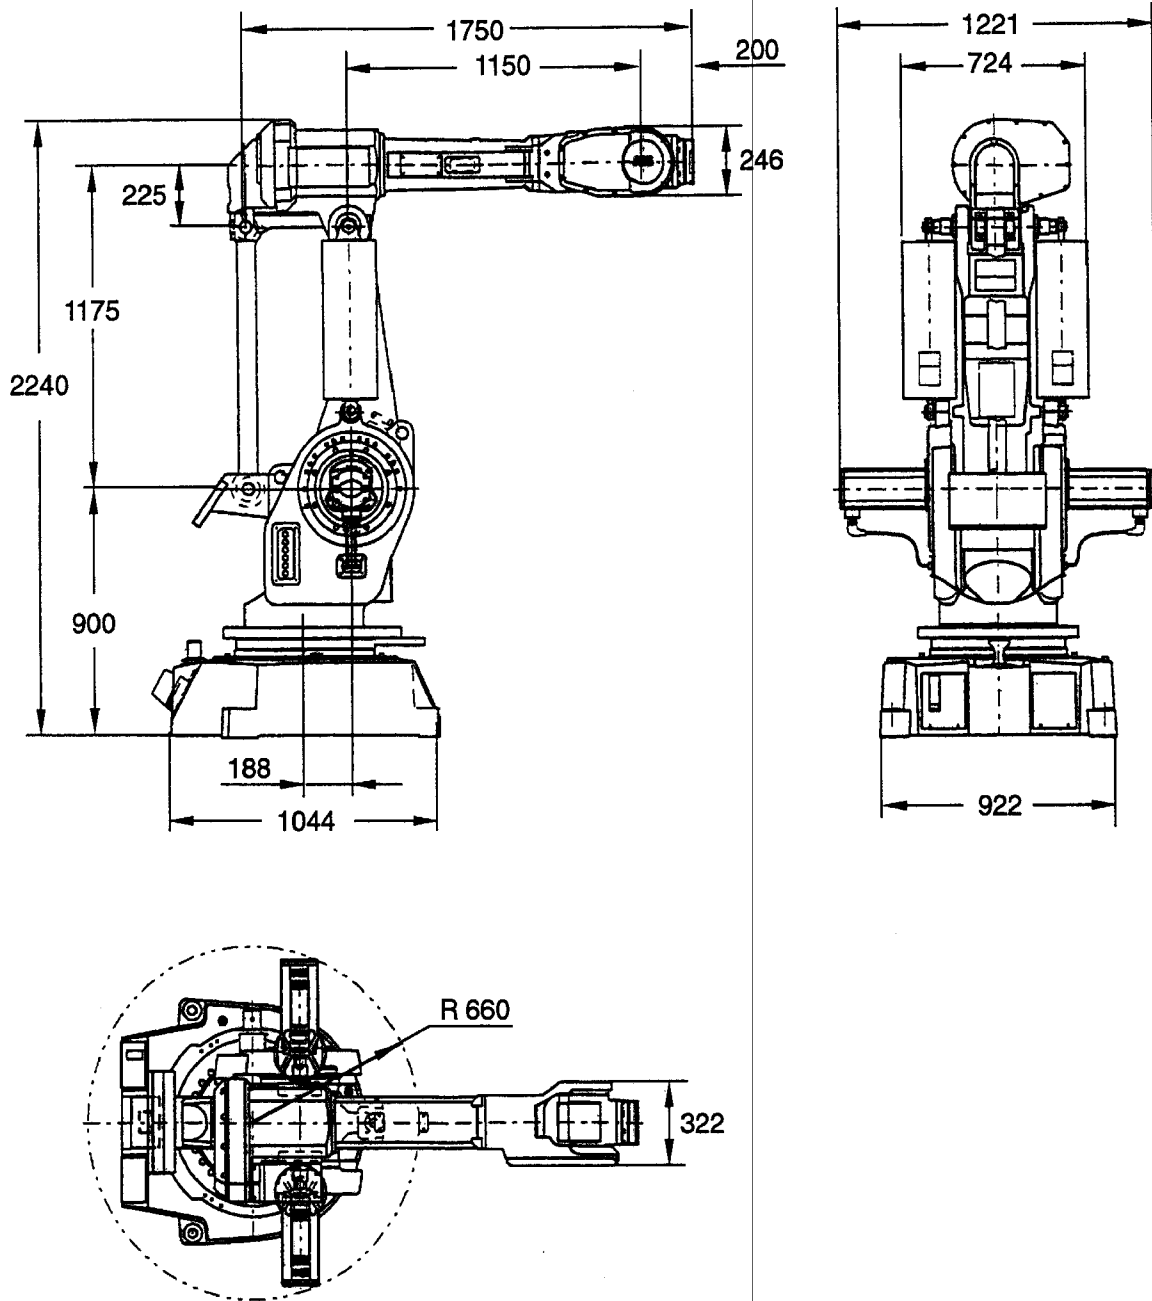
View of the manipulator from the side, rear and above (dimensions in mm).
